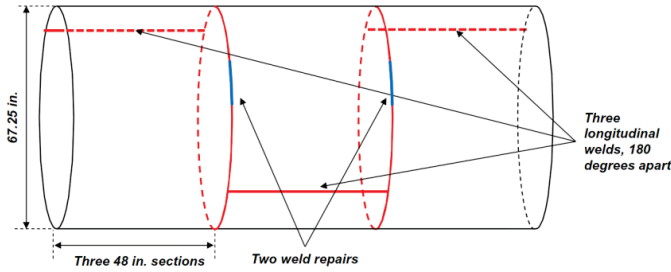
Sandia Mockup Canister Welds [8]
